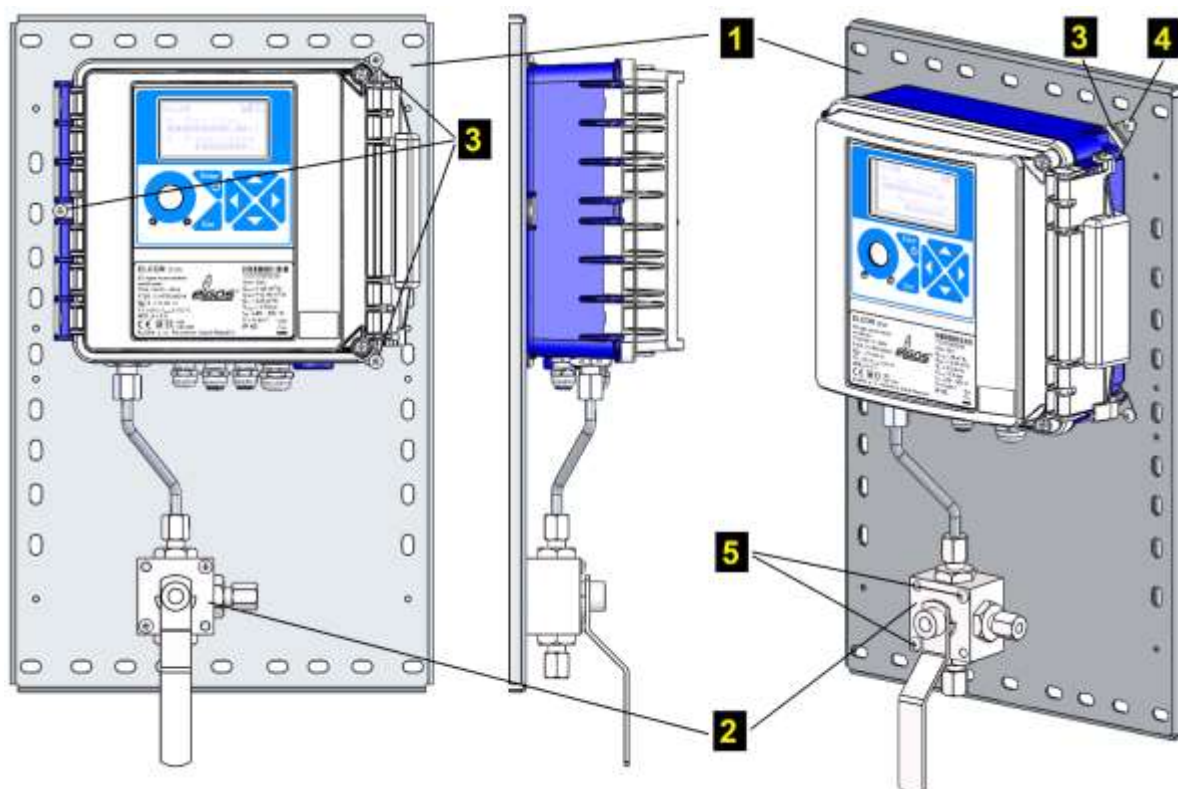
Mounting of the ELCOR convertor on the mounting plate
